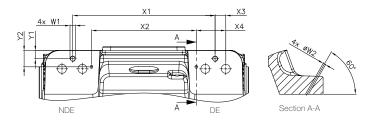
Dimensions for motors with dowel pins and leveling screws
